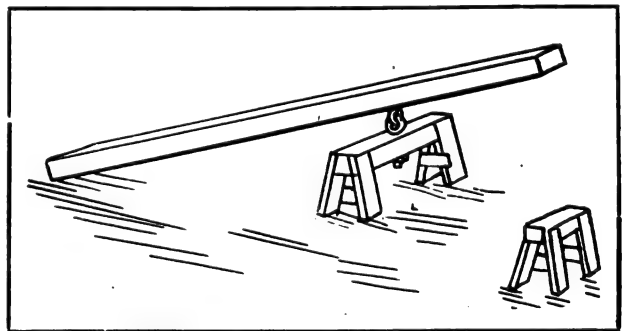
Improved Jack of Large Capacity for Use in Raising Large Machines.
